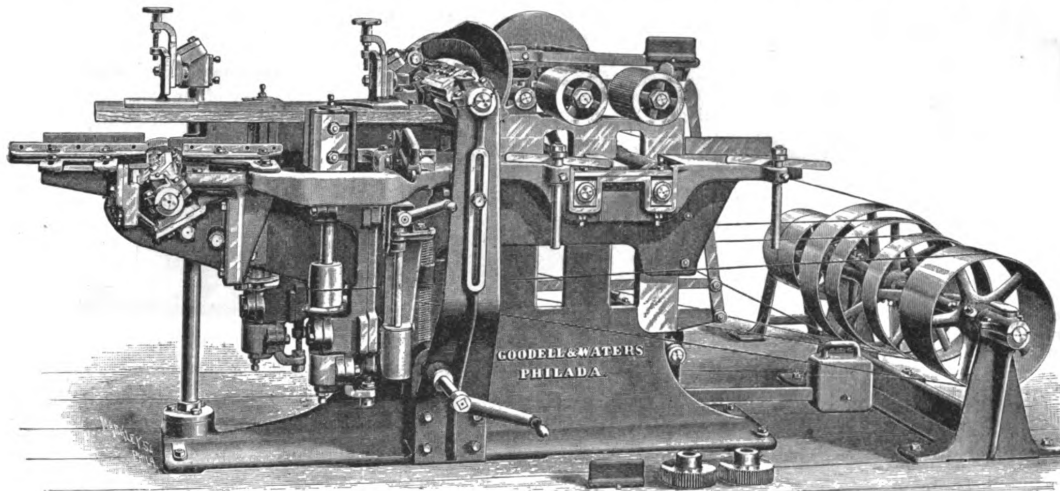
New Outside Molding Machine, Built by Goodell & Waters, Philadelphia.
